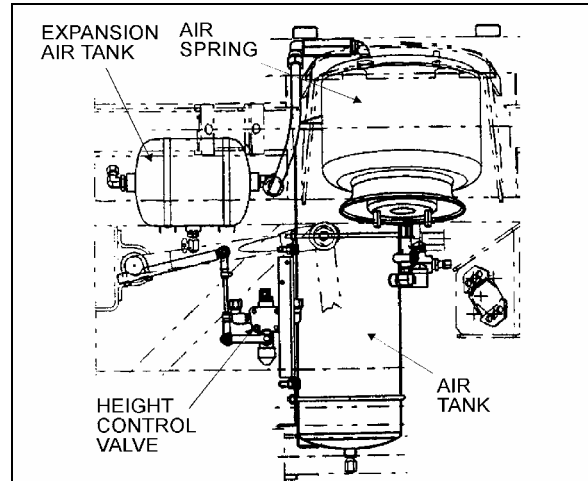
HEIGHT CONTROL VALVE LOCATION 16057
